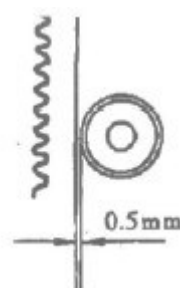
Adjustment of Back Rolls-rack Clearance
